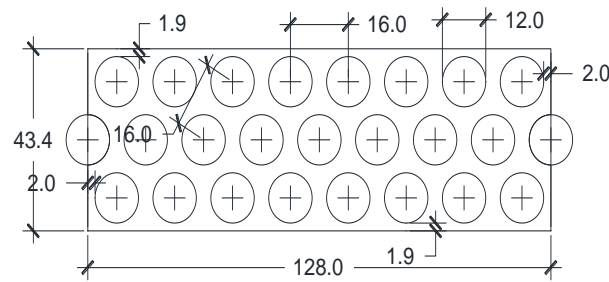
The Detailed Size of Plate B₄ (mm).
